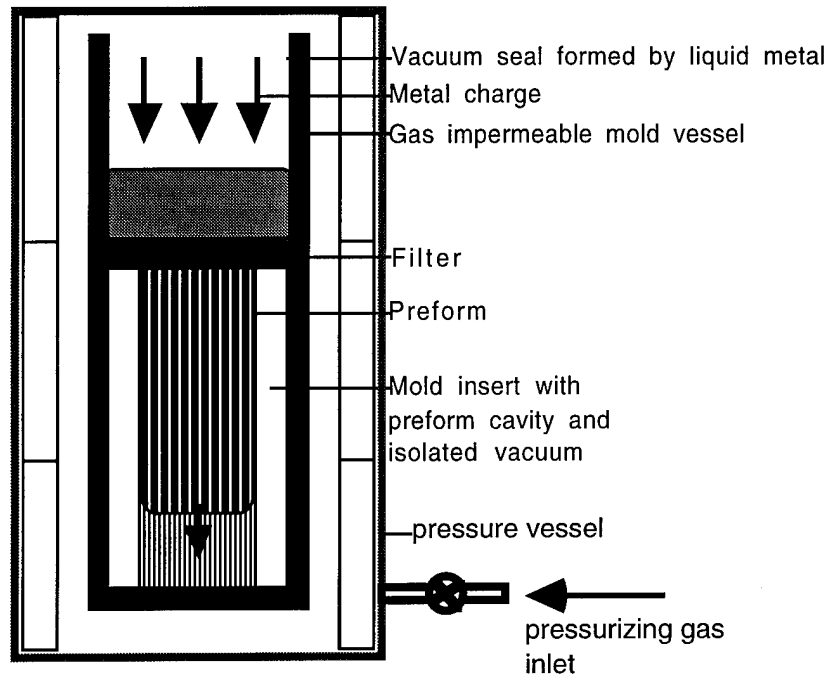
c Step 2-Isolating a vacuum in the mold cavity by the formation of a vacuum seal at the melt charge/mold vessel interface.
